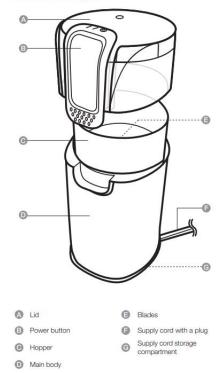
Product Exploded View from Amazon Basics Coffee Grinder
